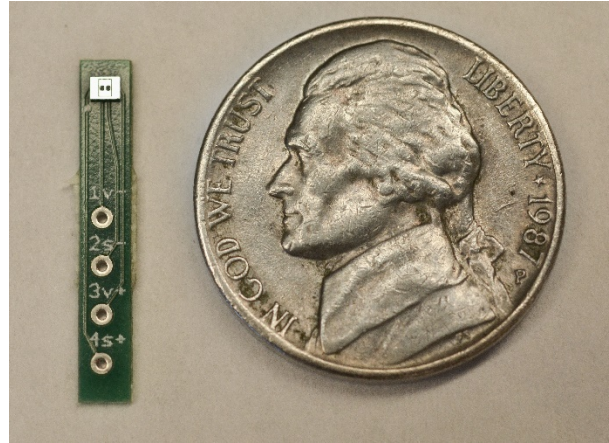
Custom printed circuit board with Endevco 40931 pressure sensor surface-mounted near the upper edge. Maximum assembled dimensions are 19 x 3.0 x 1.2 mm (L x W x H).
